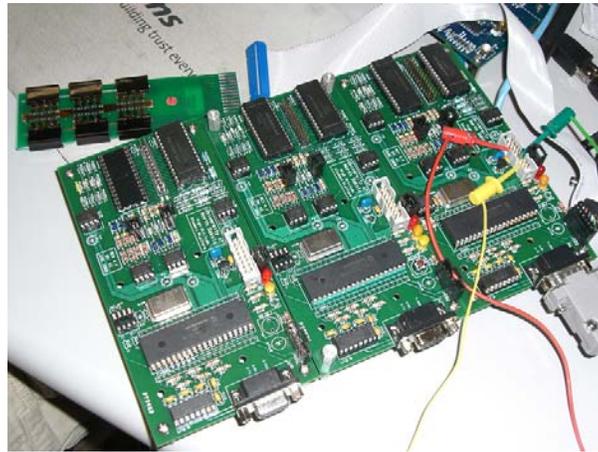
UNF sensors array on PCB and UND electronic circuit
